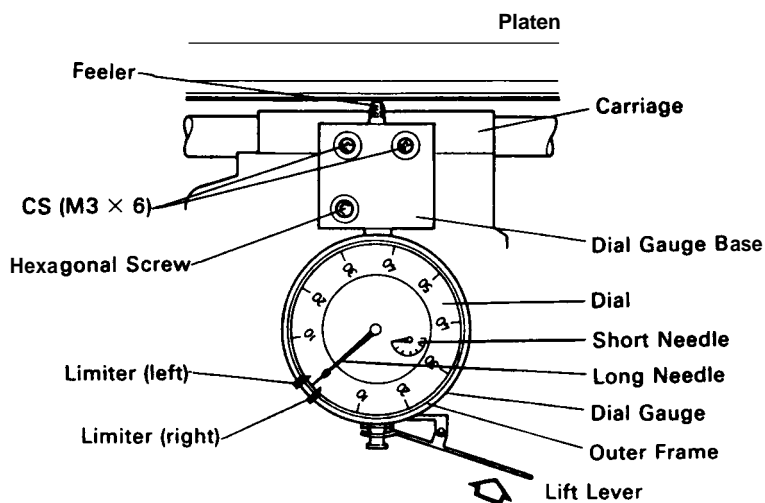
Dial Gauge Base and Dial Gauge Positions and Names of Parts
